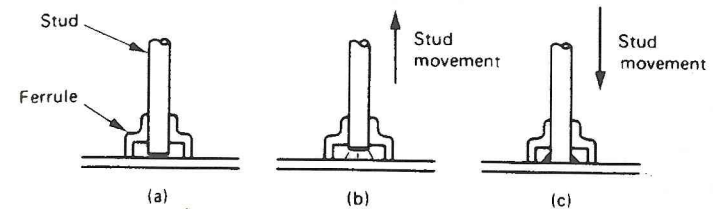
Stud welding: (a) stud and ferrule placed on plate; (b) arc drawn; (c) weld completed
